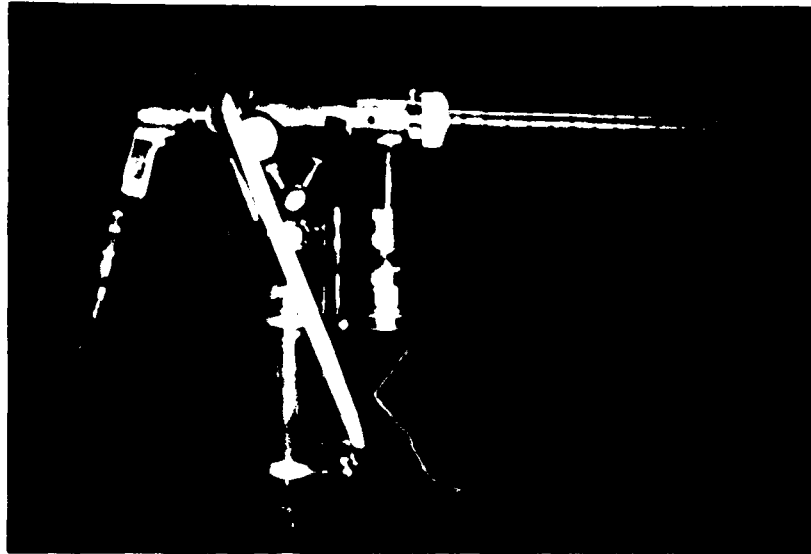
Tool with Spring-Loaded Trigger for Hand Operation of Rotary Cutter.
